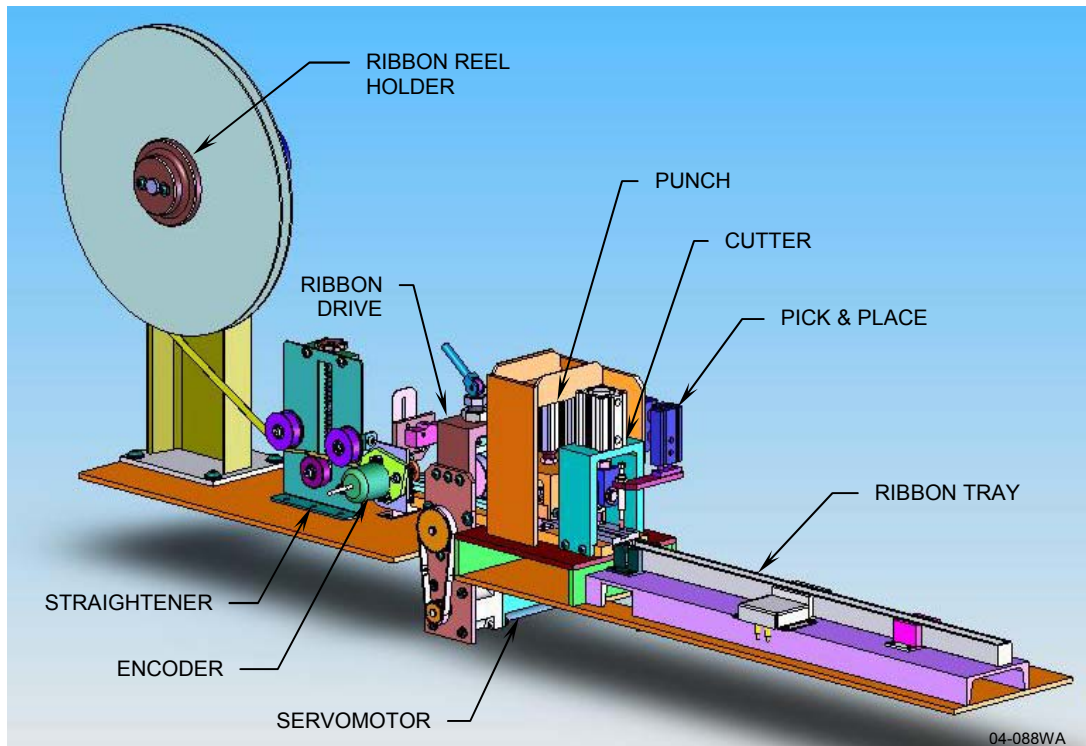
Mechanical design for the bus ribbon fabrication machine.
